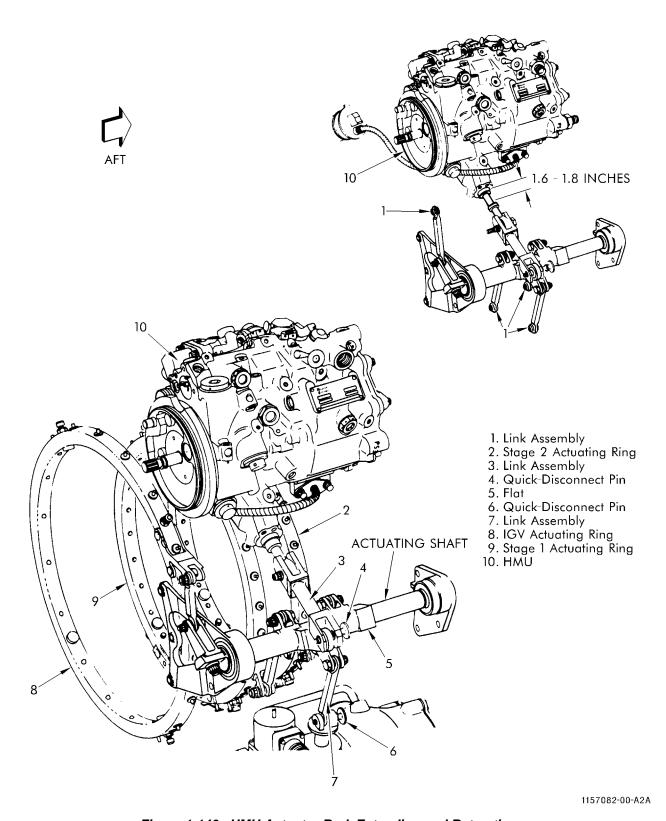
HMU Actuator Rod, Extending and Retracting
